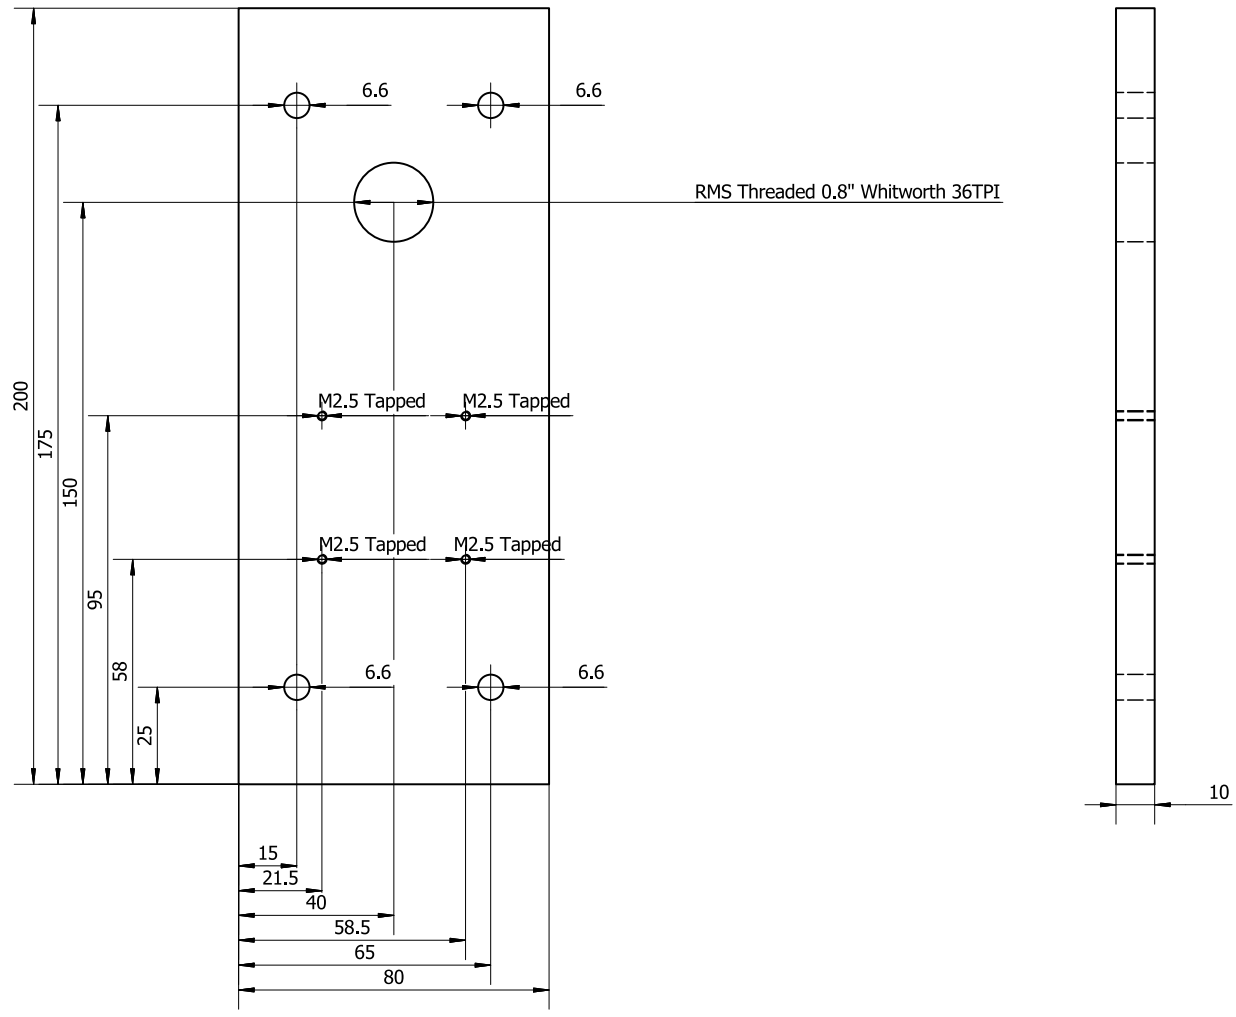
Technical drawing of the baseplate for the piezoelectric stepper stages. Material: invar.
